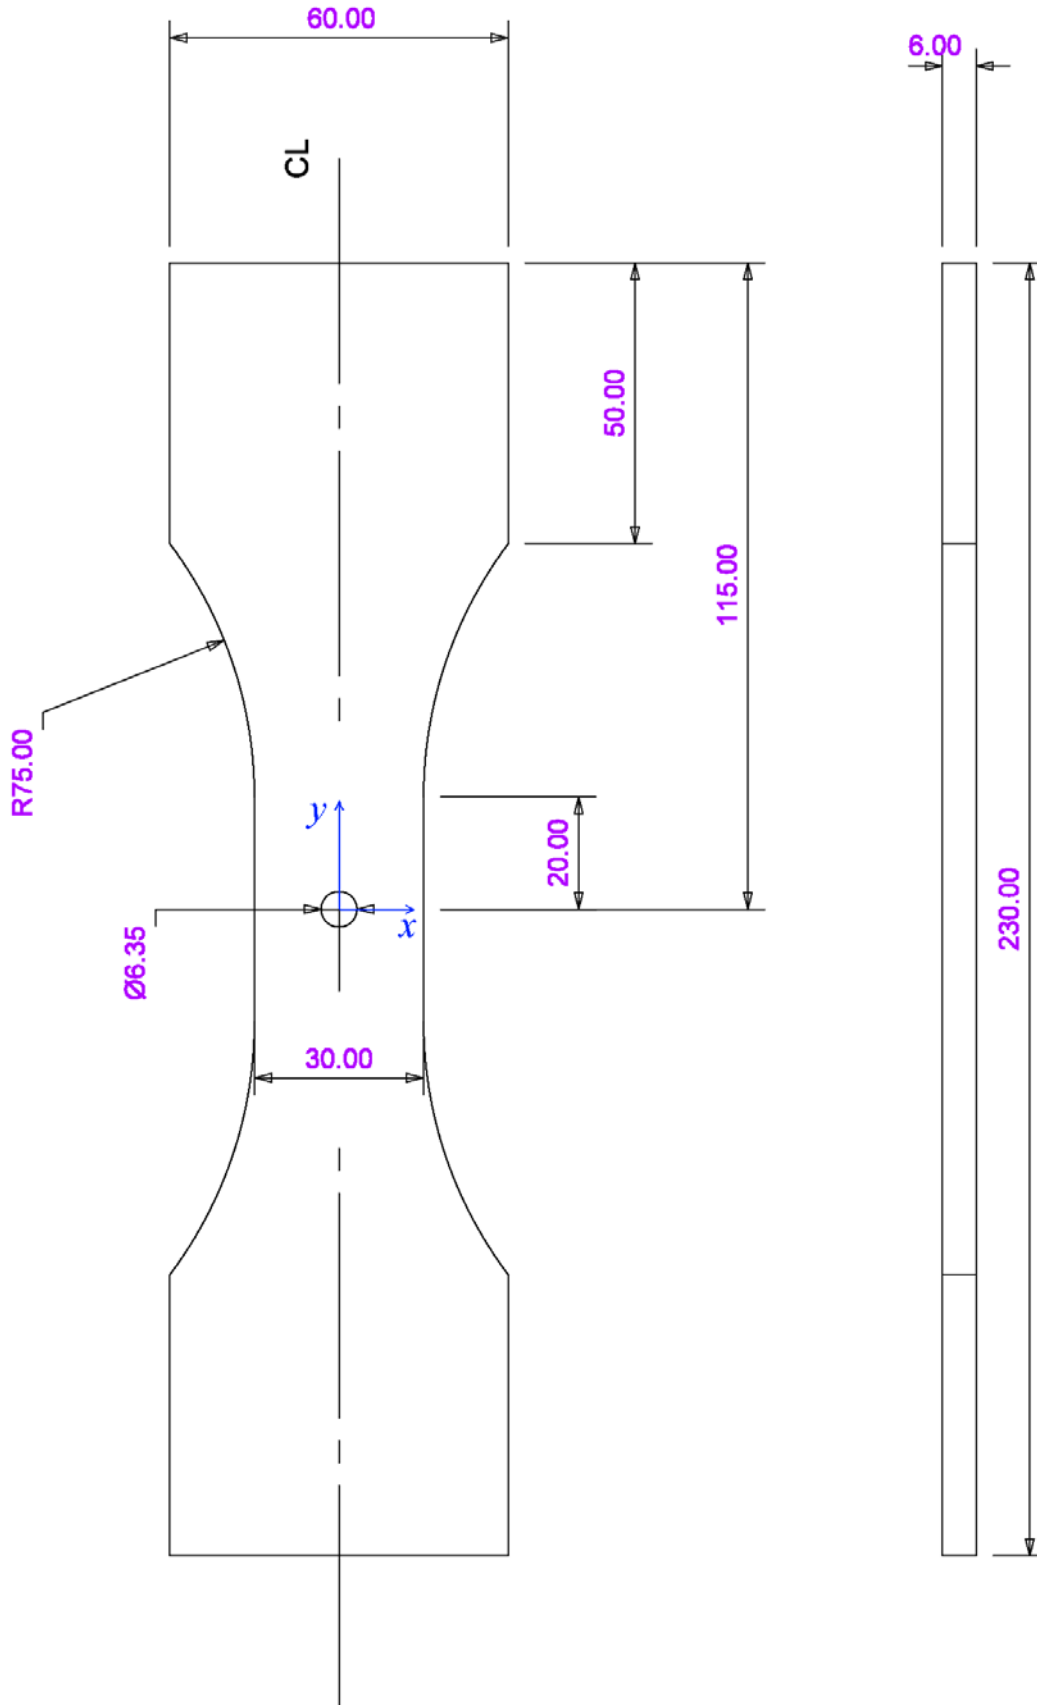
Drawing showing general dimensions of LIF Hawk Filled Hole Coupon.
